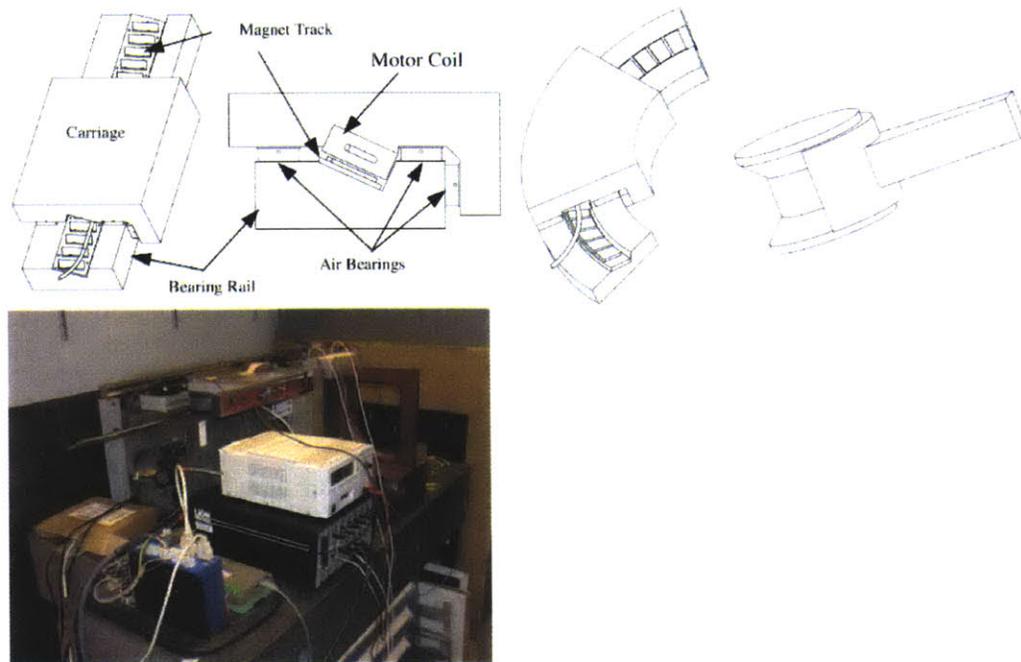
Magnetically preloaded air bearing, patented Axtrusion bearing and machine design
